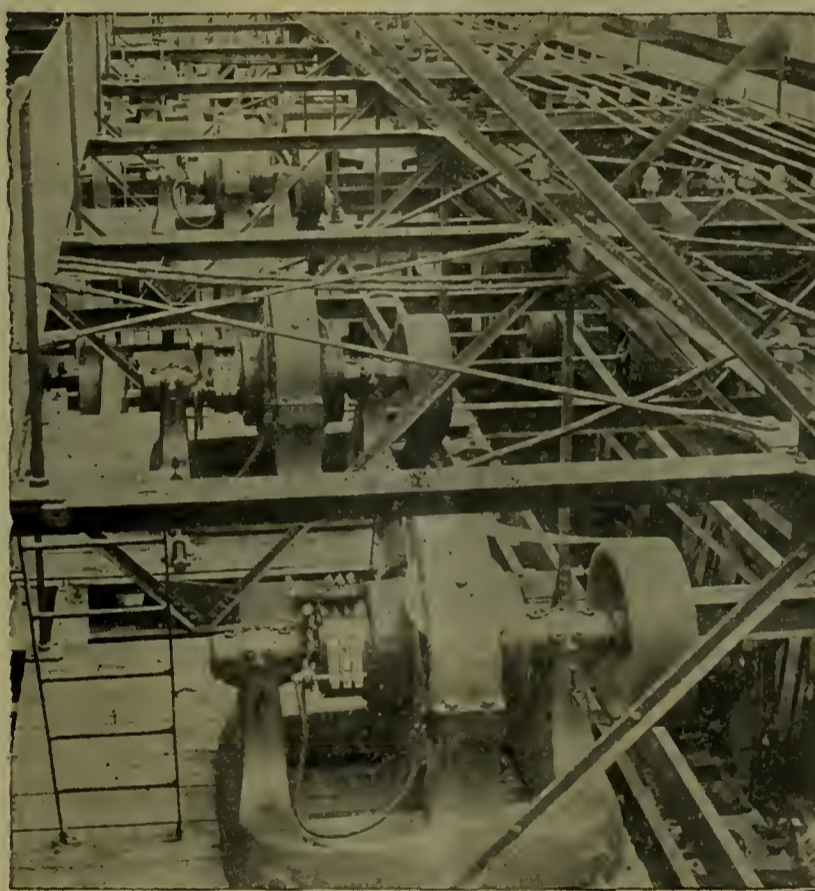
Six 500-Volt Motors attached to Roof Girders in Shop.
